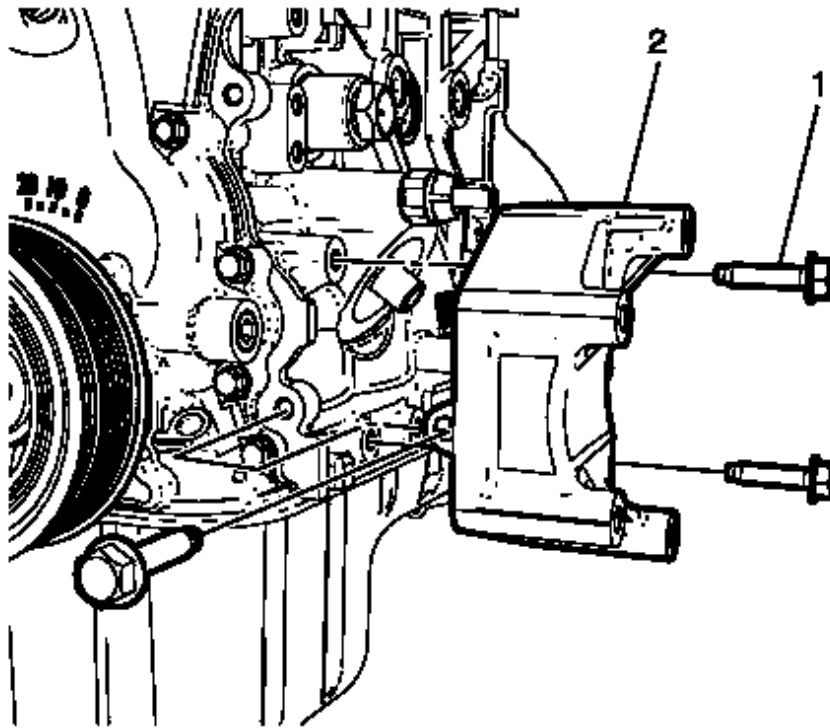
Air Conditioning Compressor Bolts And Bracket
